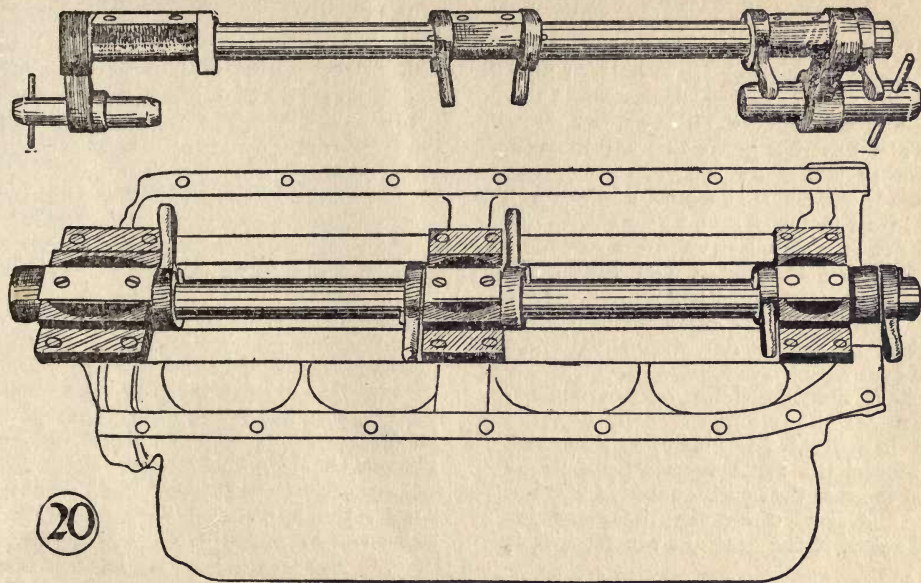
The rebabbitting jig set in position on the block. The correct distance between the camshaft and crankshaft is secured by the lugs which fit into the camshaft bearings
